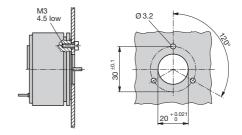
Drilling plan for fixing with 3 cheesehead screws M3.
